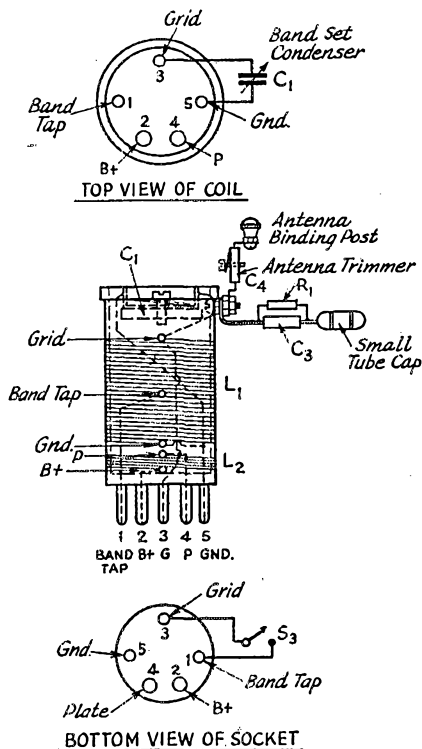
Sketch showing connections to the coil and socket for the portable receiver. The antenna coupling condenser, C_4 , as well as the grid condenser, C_1 , grid resistor, R_1 , and the tube cap connector are fastened to the top of the coil form by a small machine screw. C_1 is mounted inside the form with a connecting lead running from each of its terminals to pins in the bottom of the form. L_1 and L_2 should be spaced about $\frac{1}{8}$ inch.
